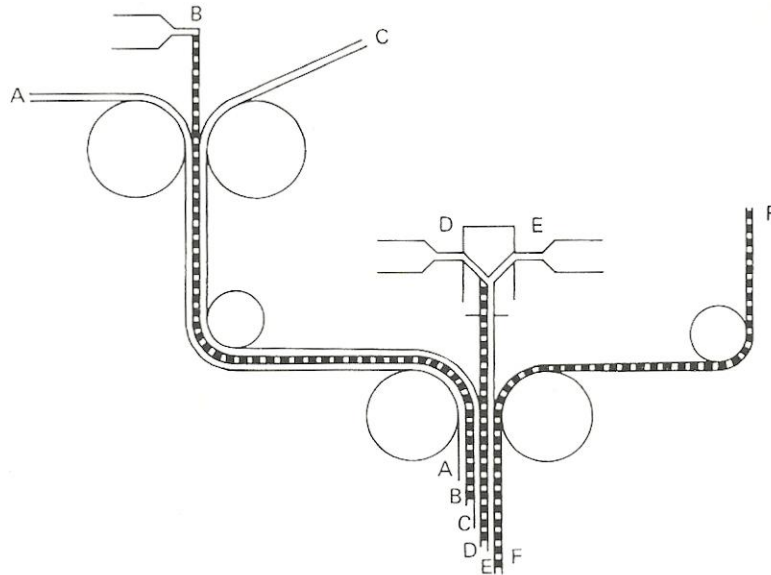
Laminated PP/PE Pouches for Hand Filling (Courtesy of TH Plantation)
